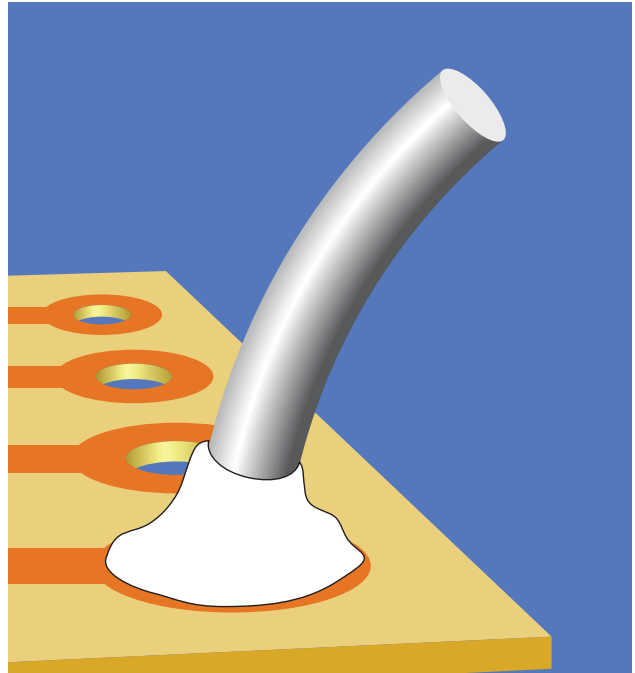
The underside of perforated board, with an ideal amount of solder.
